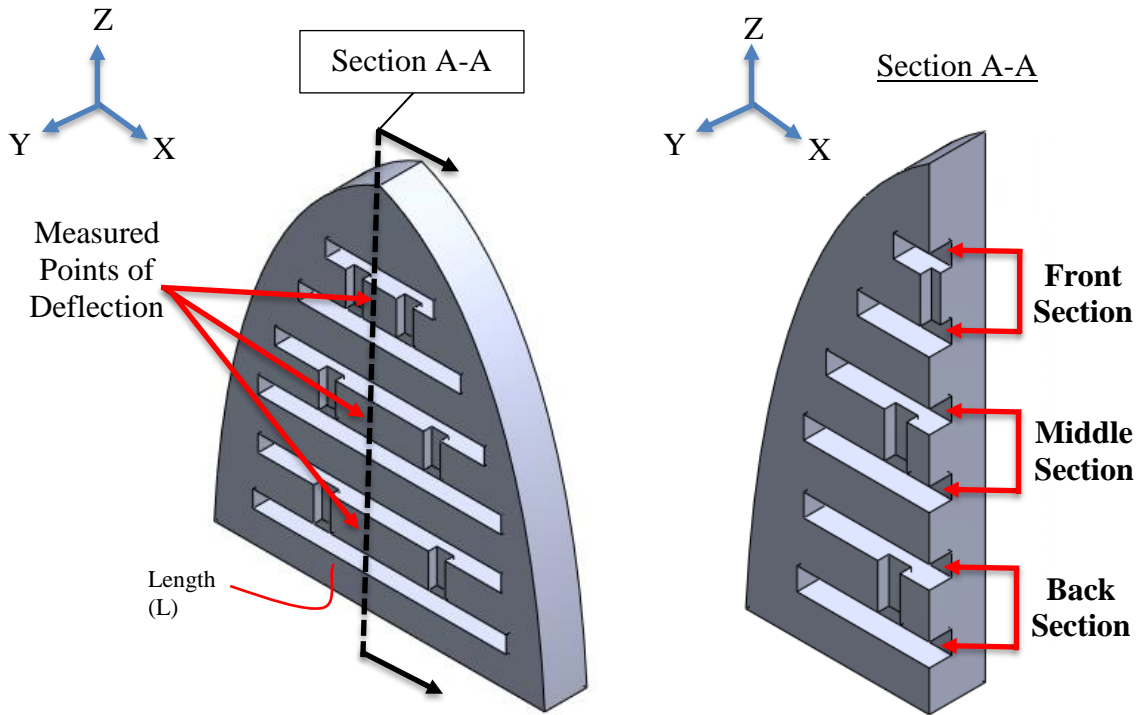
Silicone tongue (a) assembly and (b) section A-A cut view.
